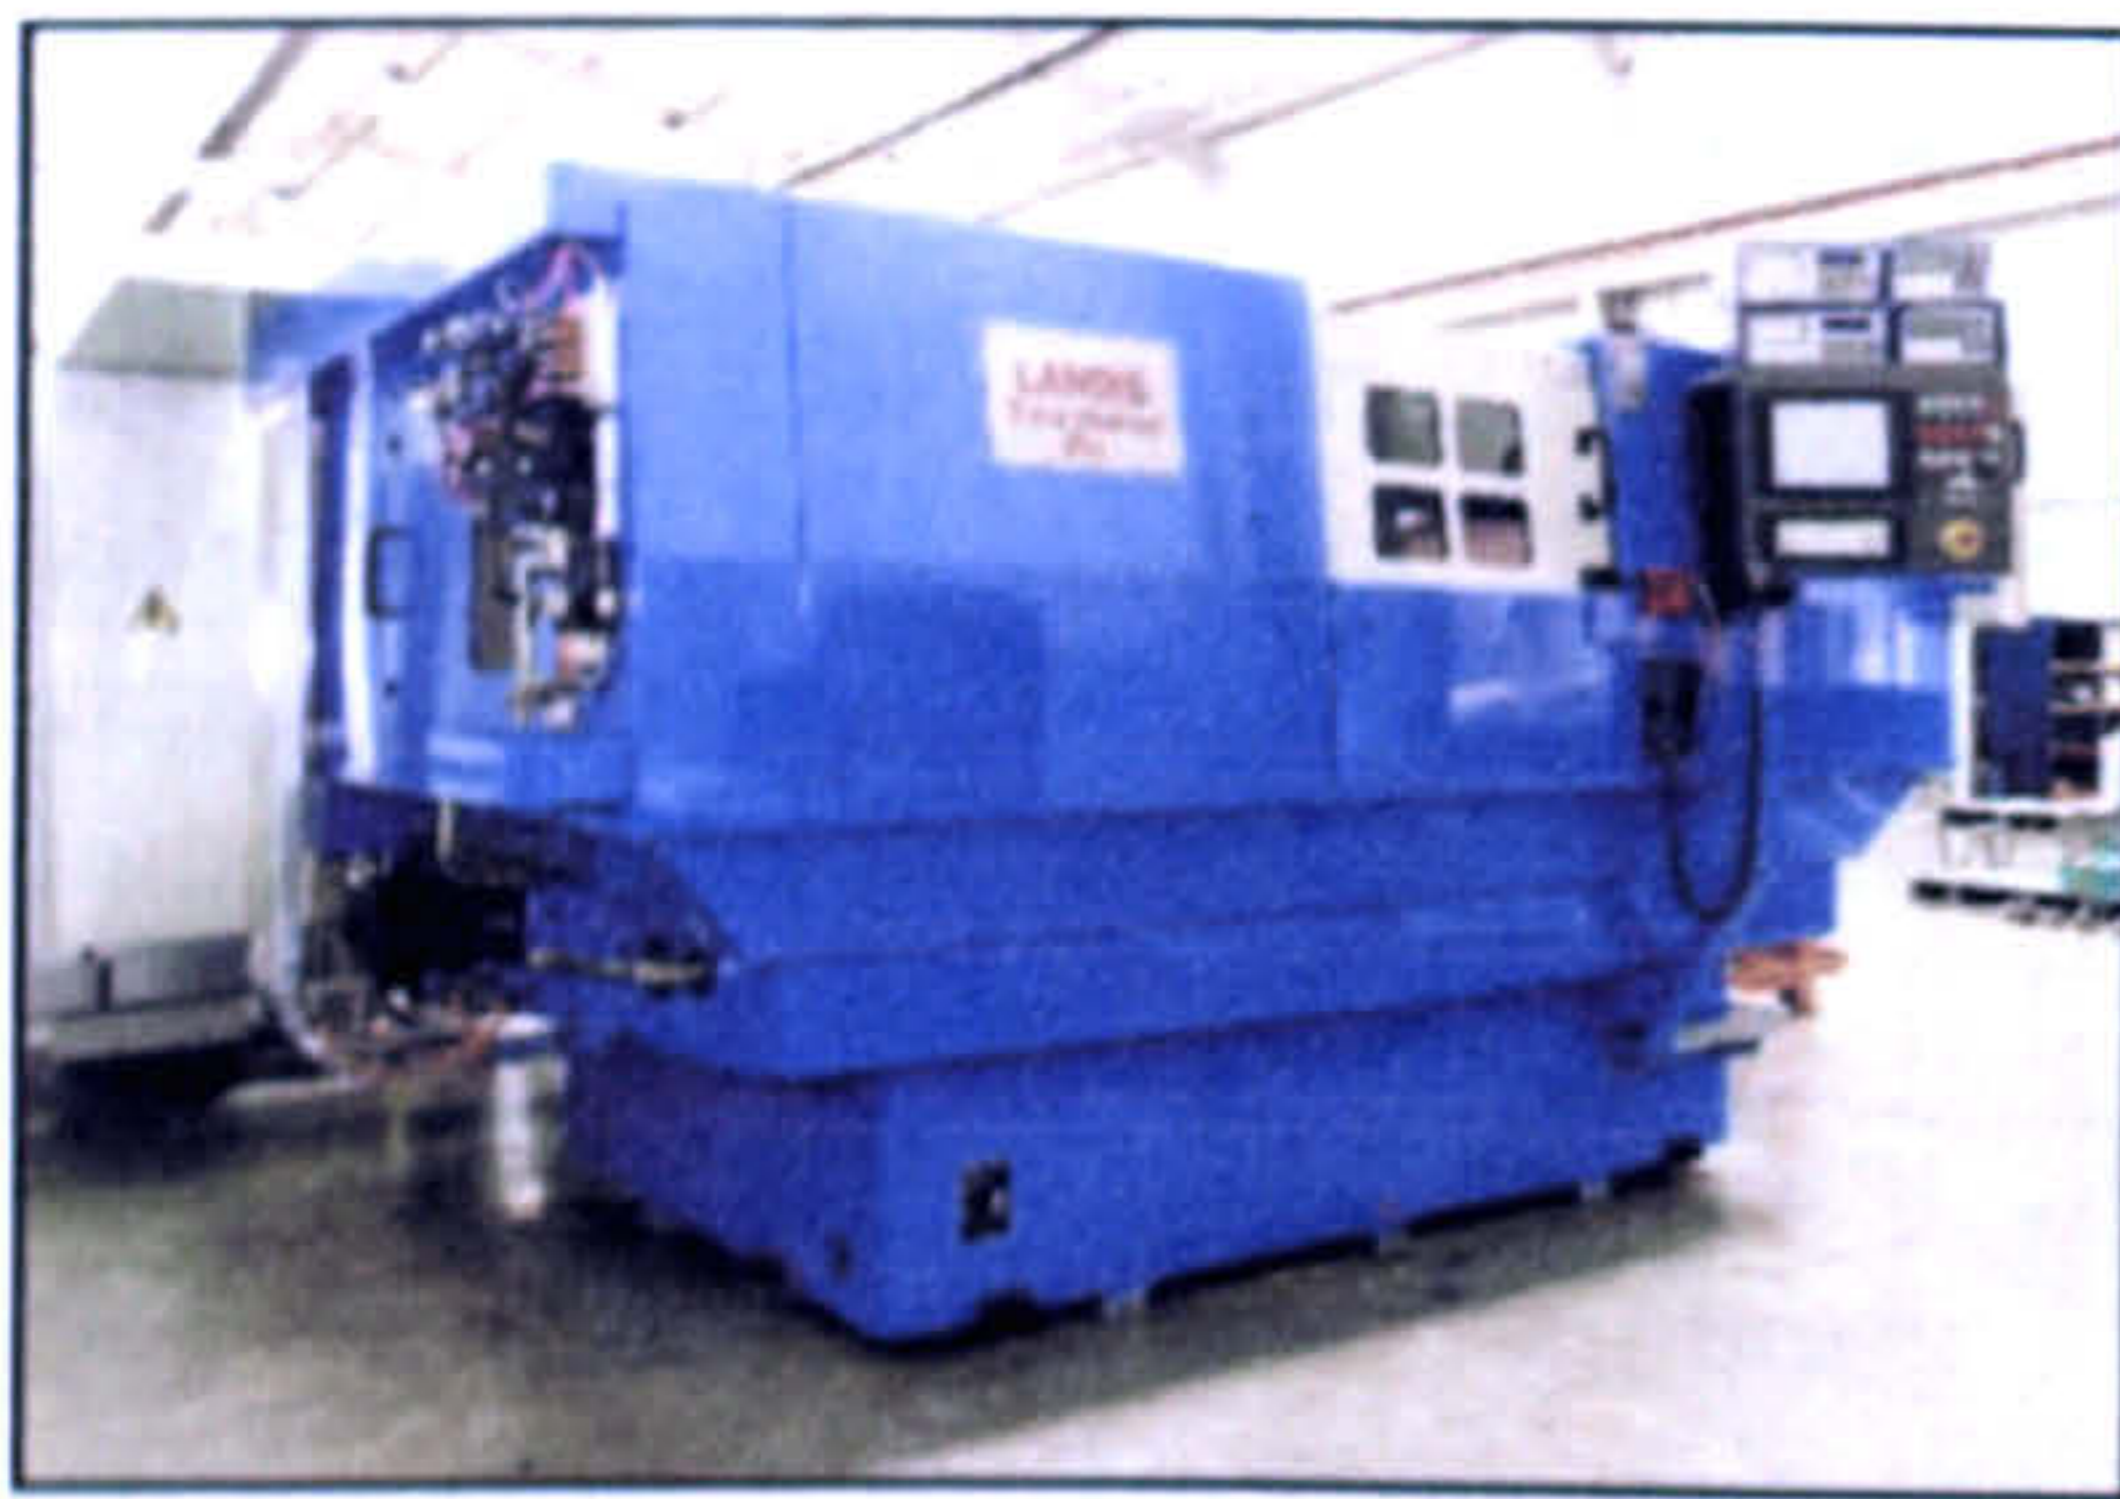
Photograph of Orbital Twin-Wheel Crank Grinding Machine
